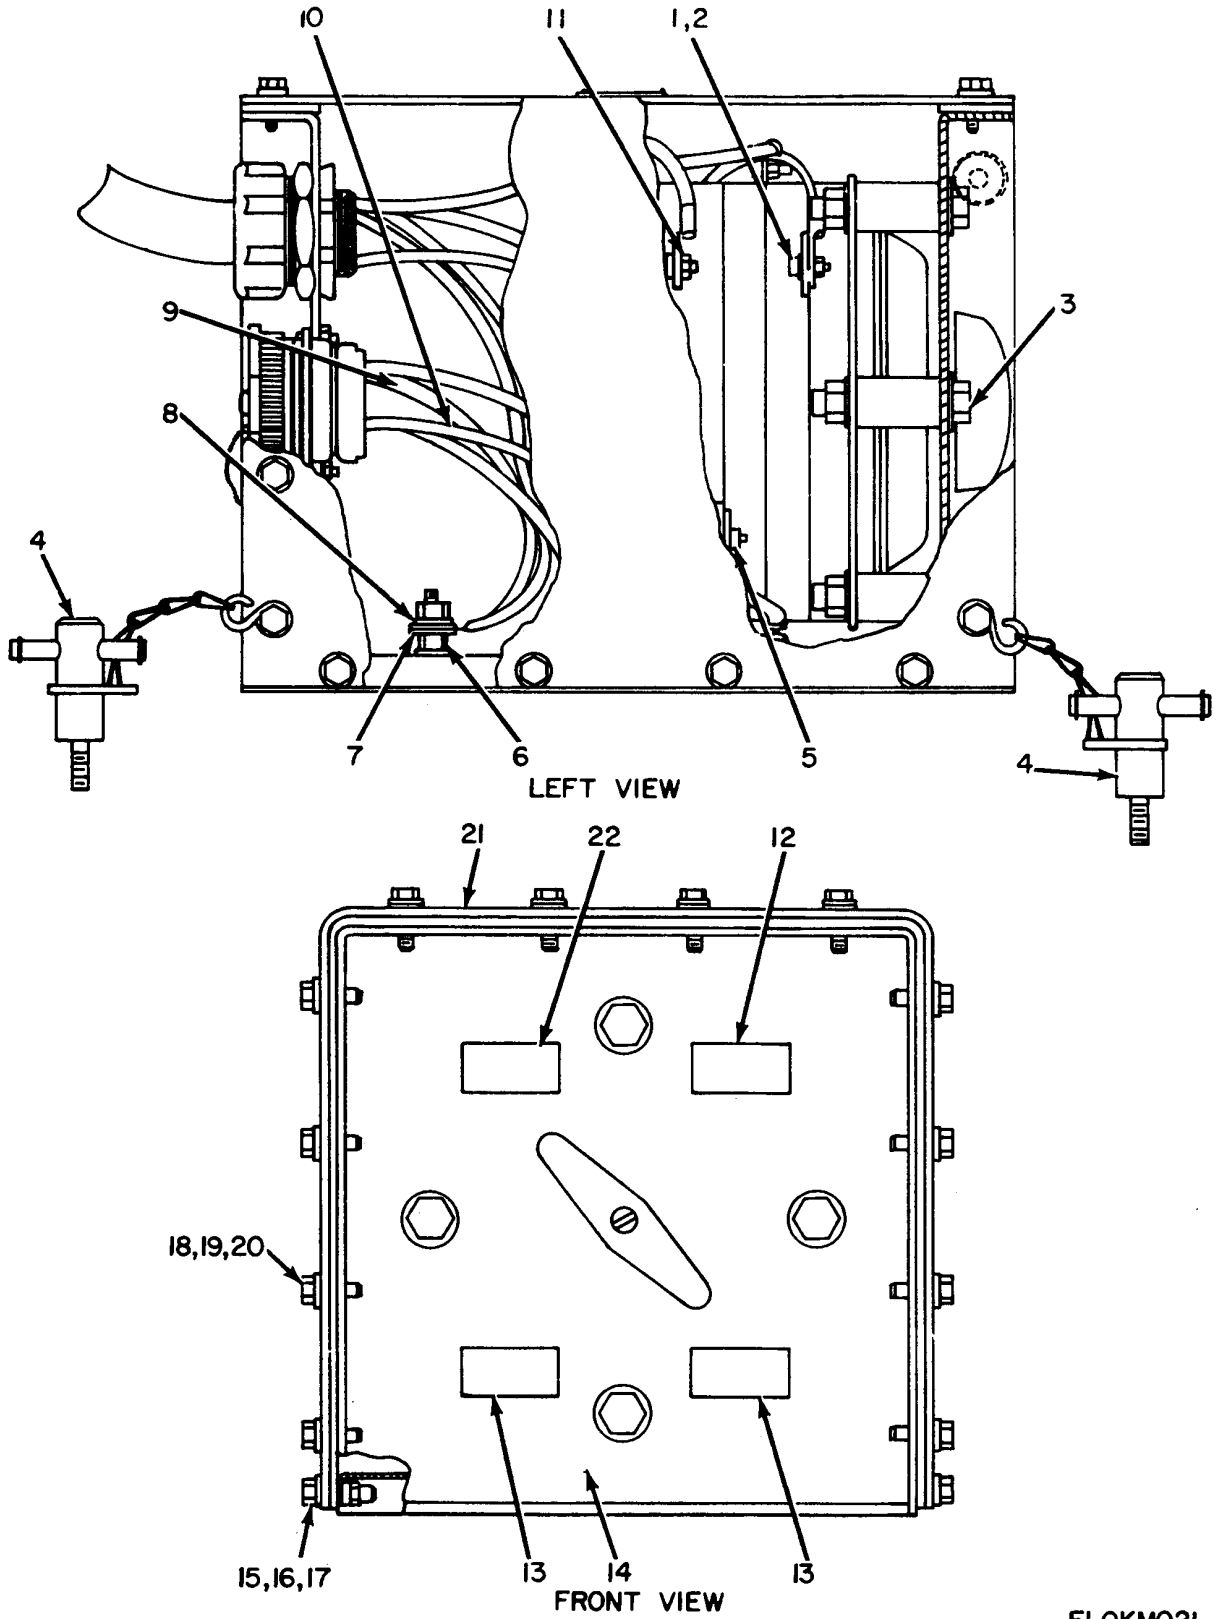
Wave Guide Installation Assembly (Sheet 1 of 2)
